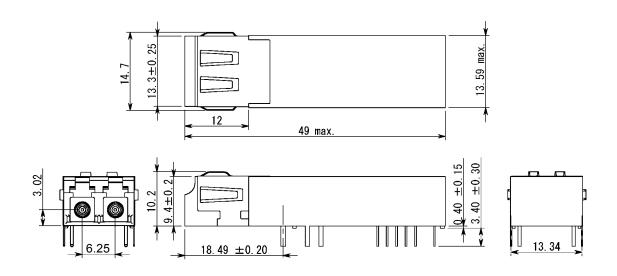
Outline Dimensions (SCM6212-GL-C#)
